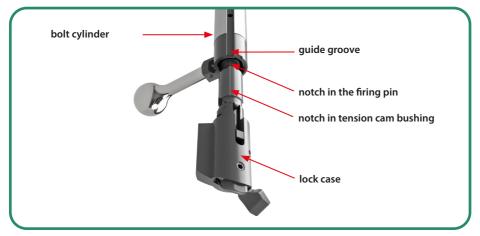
SIGNATURE®: Reassembly of the Bolt
